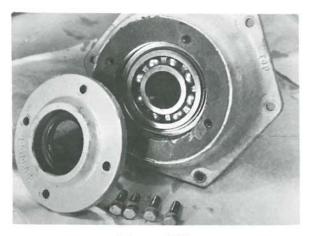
Install the front bearing. Install the retainer and bolts. Tighten the bolts to the specified torque. (See torque chart.)
